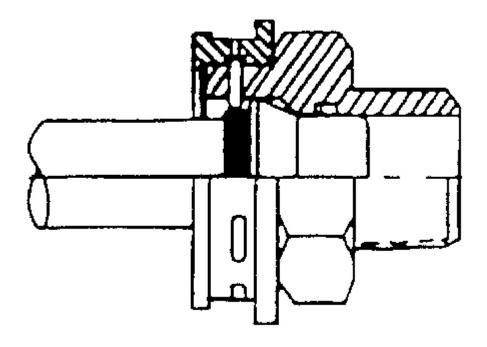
View Of Cooler Line & Plastic Cap Courtesy of GENERAL MOTORS CORP.
